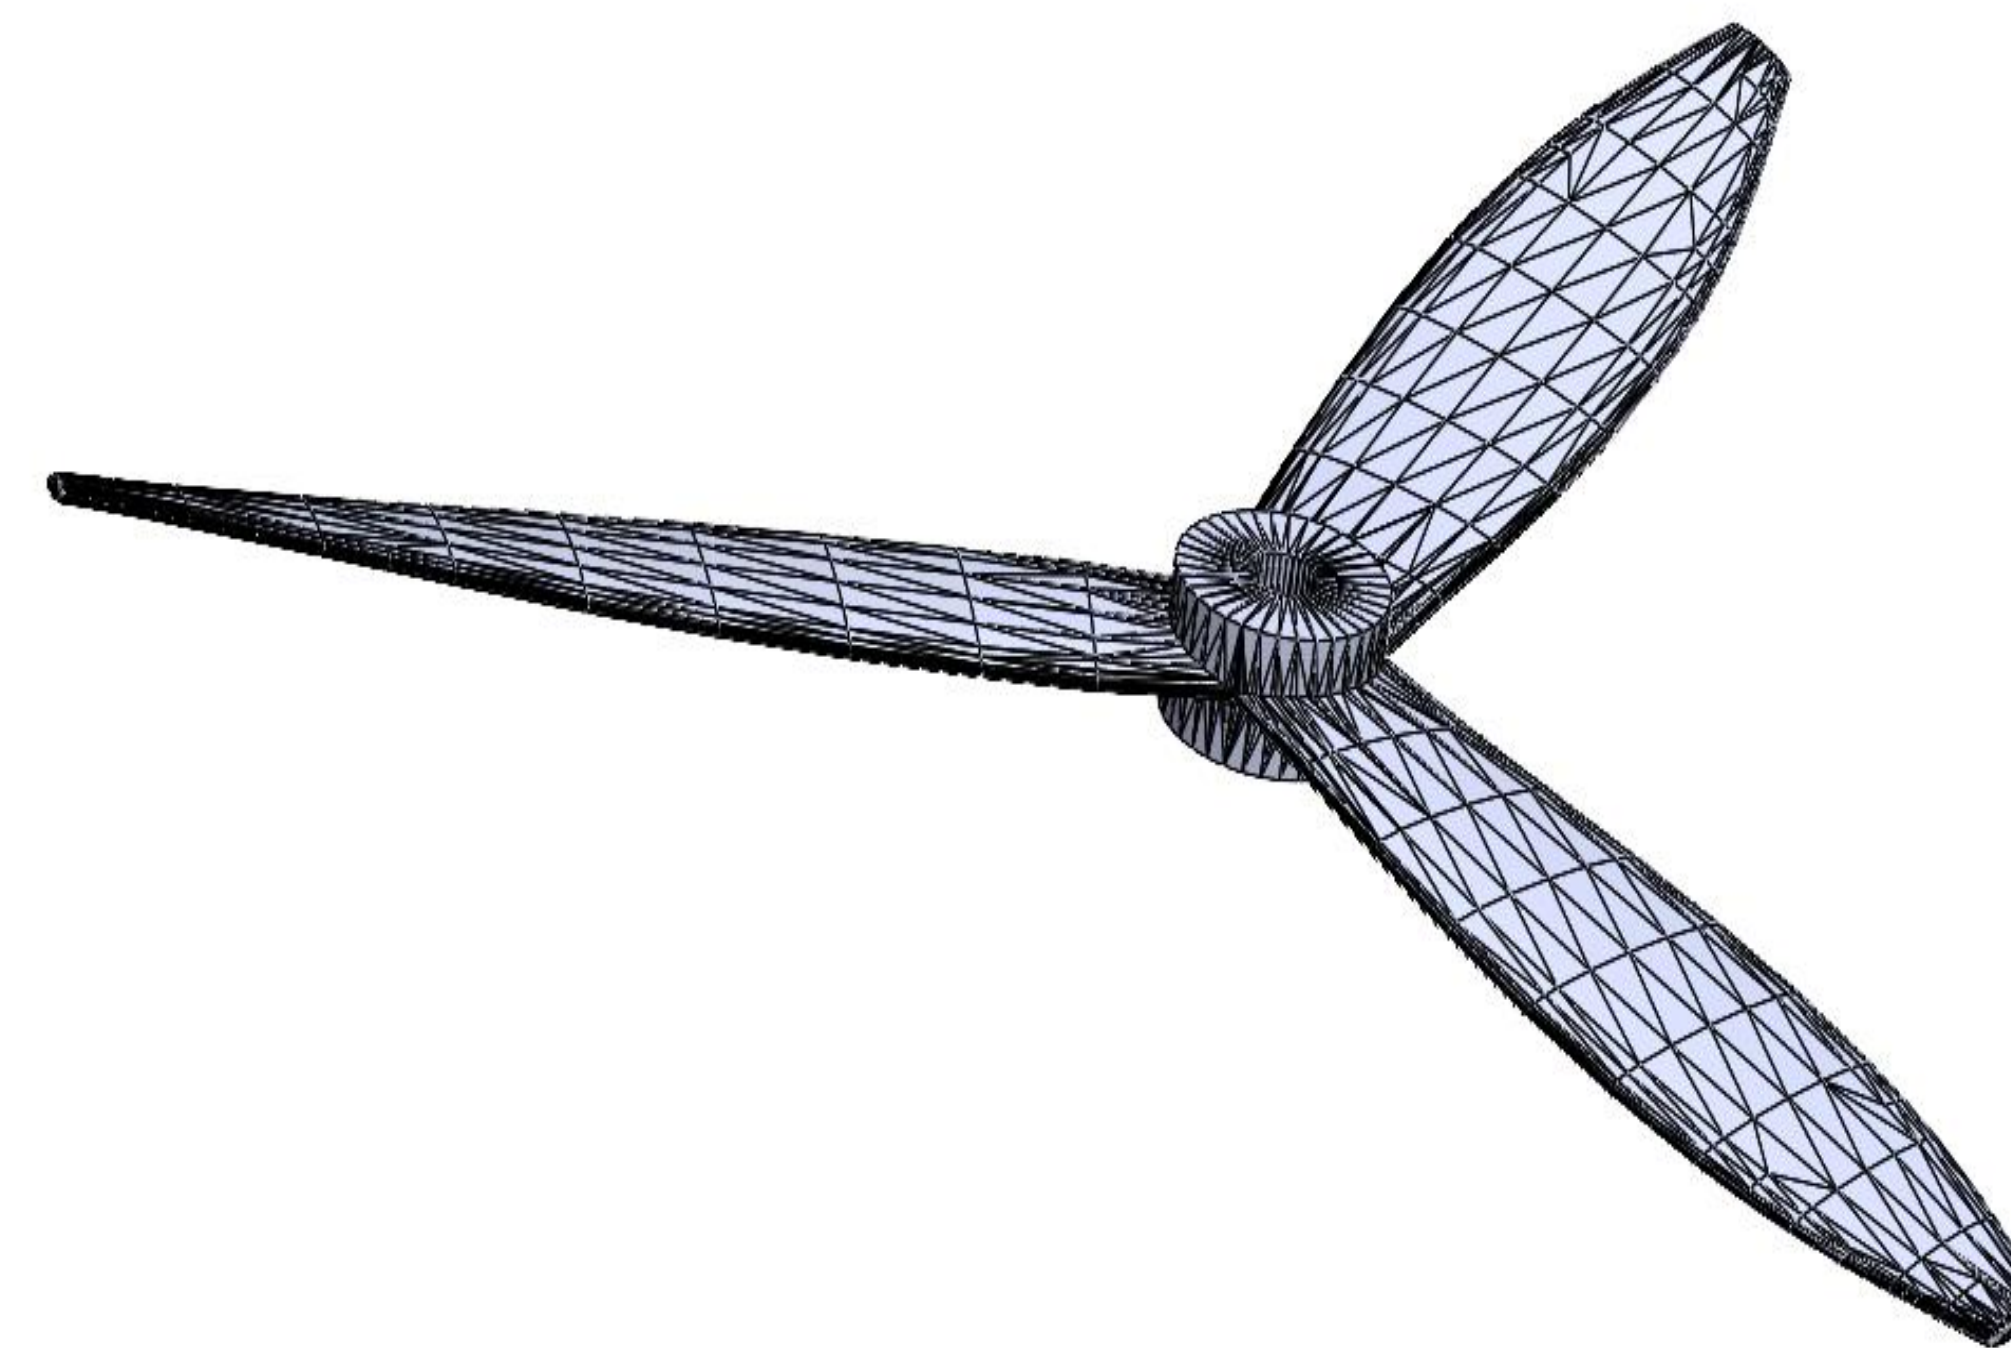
Three-Dimensional Flex Blade Design via Solidworks
